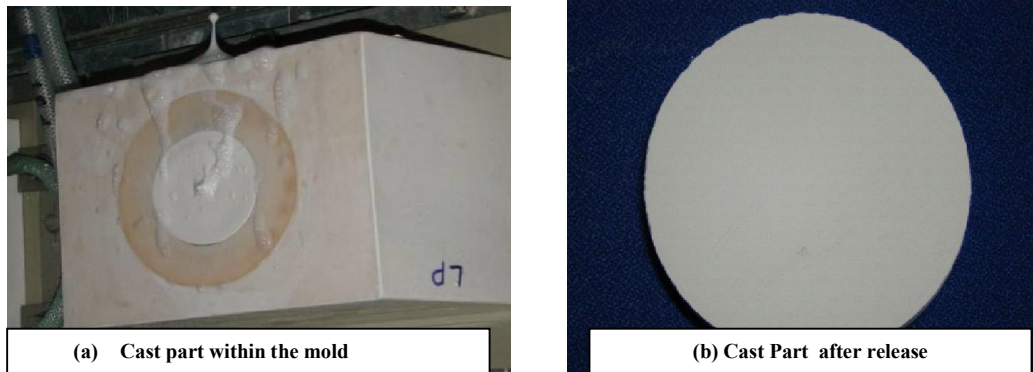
(a) Cast part within the mold and (b) Cast part (Typical) after mold release
